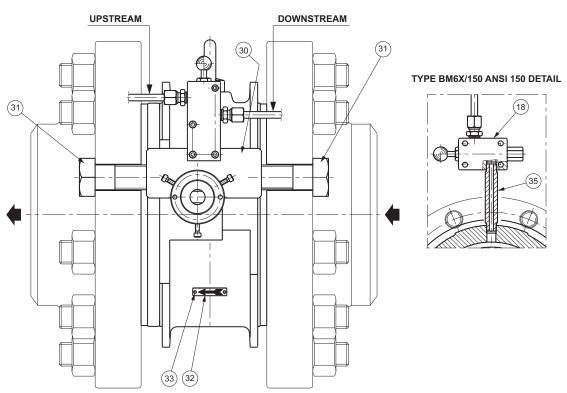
BM6X Series Slam-Shut Valve DN 80/100/150 Casting Version
